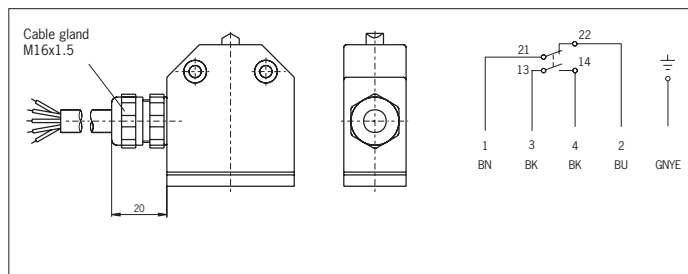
Dimension drawing/connection diagram of SN01.558X... with connection cable (PUR cable, 5x0.5 mm²)
